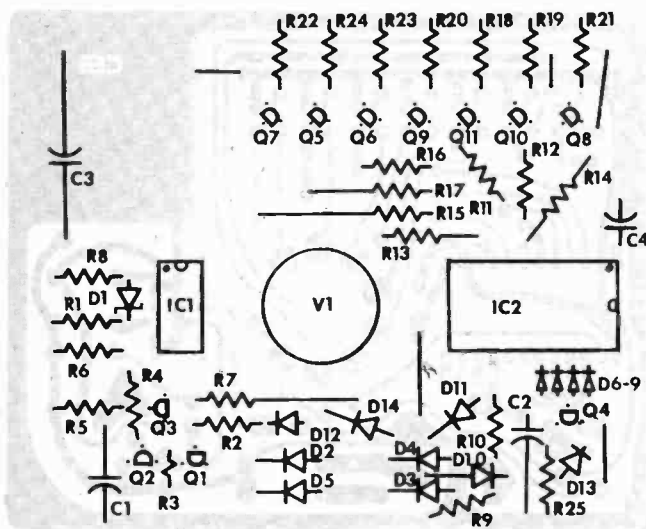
The actual-size foil pattern above can be used to make a printed circuit board with parts placed as at right.
